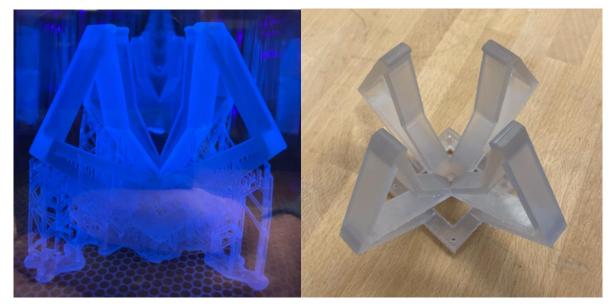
SLA curing process (left) and final soft gripper (right)
